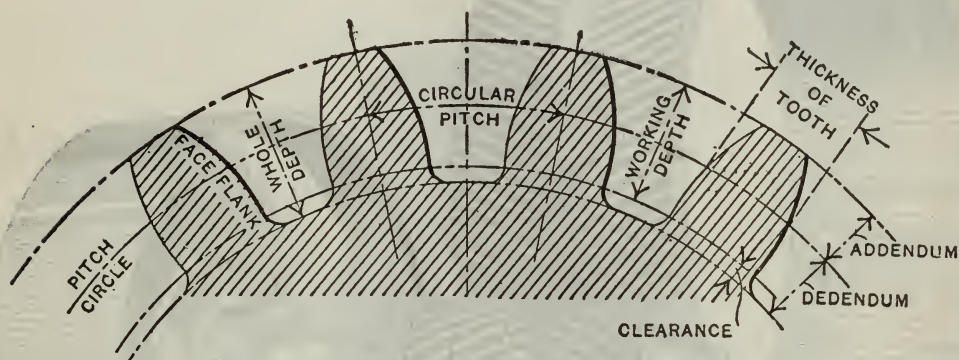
,184.—Gear tooth parts. Systems of spur gearing. Two systems of gear tooth are used for spur gears: the *cycloidal* and the *involute*. Of these, the involute system is the one more commonly used, especially for cut gearing. The standard involute gear tooth has a  $14\frac{1}{2}$  degree pressure angle, hence the rack meshing with gears cut according to this standard has straight sides inclined  $14\frac{1}{2}$  degrees from the vertical. Definition: *Circular pitch* is the distance from center to center of two adjacent teeth along the pitch circle. *Diametrical pitch* is a number found by dividing the number of teeth by the pitch diameter; that is, it gives the number of teeth for each inch of pitch diameter. Internal spur gears. The dimension of internal spur gears may be found by the same formulæ as those for external spur gears, except for the modification made necessary by the fact that the center distance in internal gearing is equal to the difference between the two pitch radii, instead of the sum. In addition, the term inside diameter takes the place of the outside diameter of external spur gearing. This diameter, of course, is the diameter of the hole in the blank before the teeth are cut. In laying out the shape of teeth for internal gearing, interferences are almost sure to be met with. The points of internal gear teeth must, therefore, be relieved to avoid interference with the flanks of the meshing teeth. Interference occurs also when the pinion has too nearly the same number of teeth as the gear. In this case there is a tendency for the points of the pinion and the gear teeth to strike as they roll into and out of engagement. To avoid this interference, the teeth must be cut by specially made cutters or shaped on a gear shaping machine.
